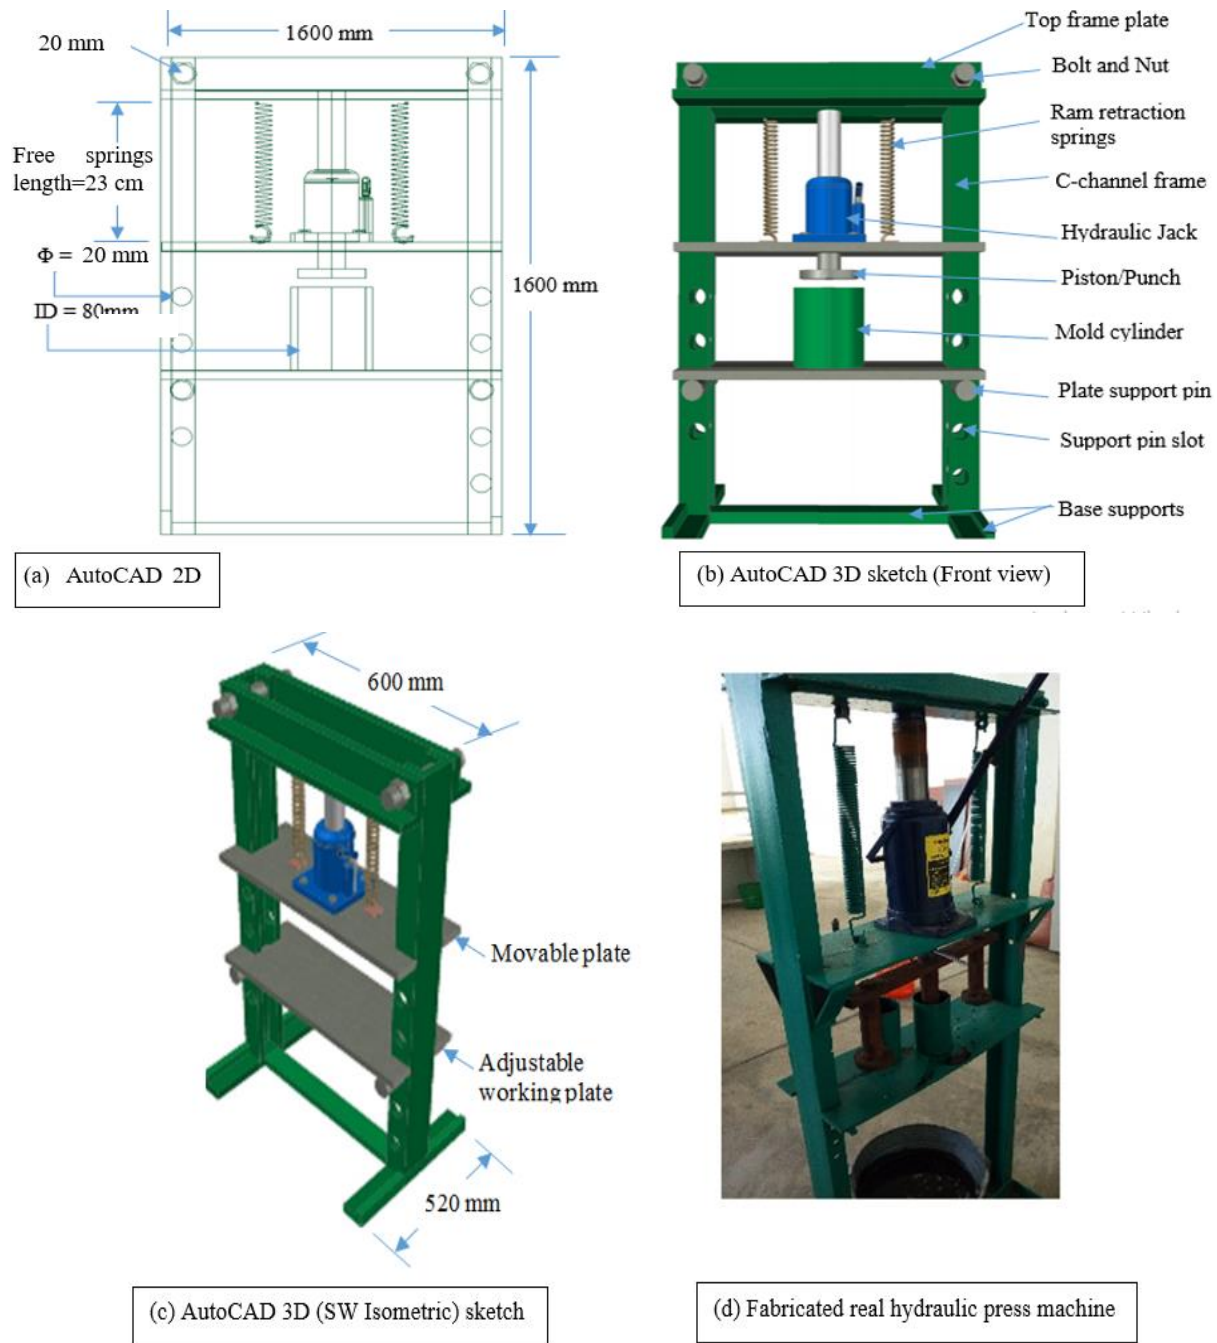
AutoCAD designed and assembled Hydraulic briquetting machine
